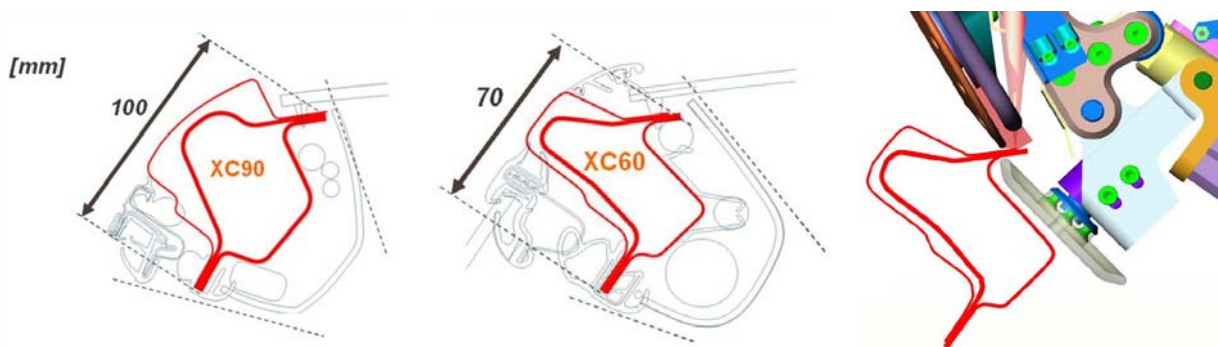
Difference in A-pillar cross section between the XC90 and XC60 models, and at the right the roller clamping device necessary for laser welding.
